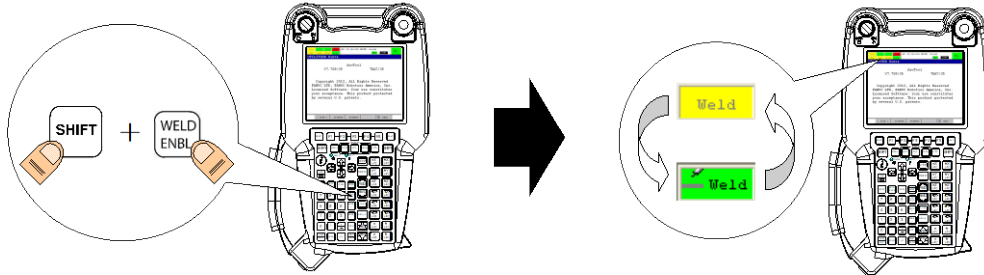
(b) Switching Operation of Weld Enabled/Disabled by WELD ENBL Key
